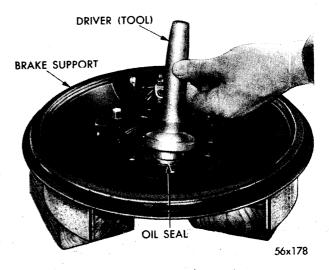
Removing or Installing Outer Rear Axle Shaft Oil Seal with Tool C-839
